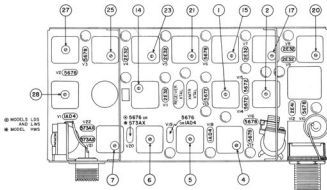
Top View of Chassis Showing Location of Alignment Adjustments and Tubes
